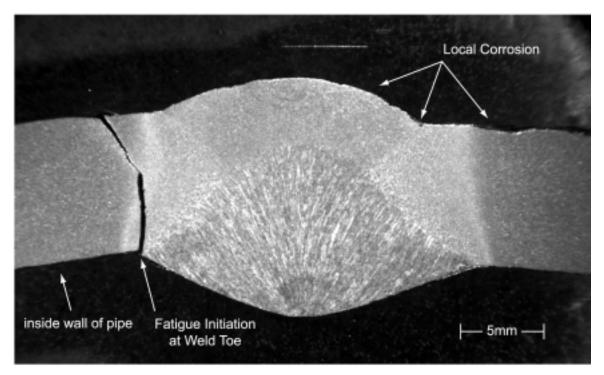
Fatigue initiating at toe of weld on interior surface of pipe.
